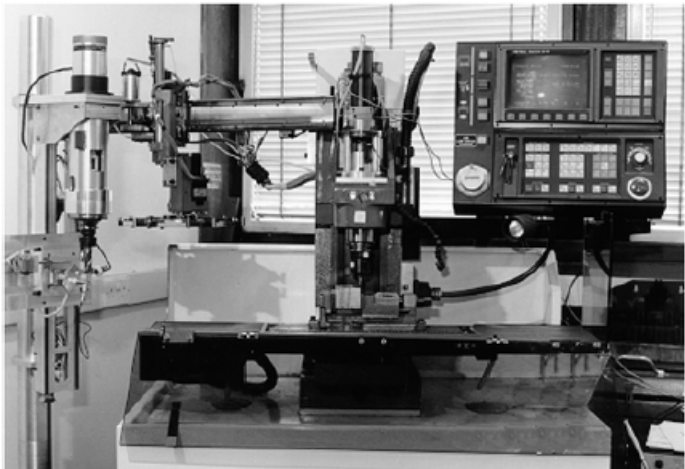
Integration of Laser-based Tool Inspection System with CNC Machining Centre
